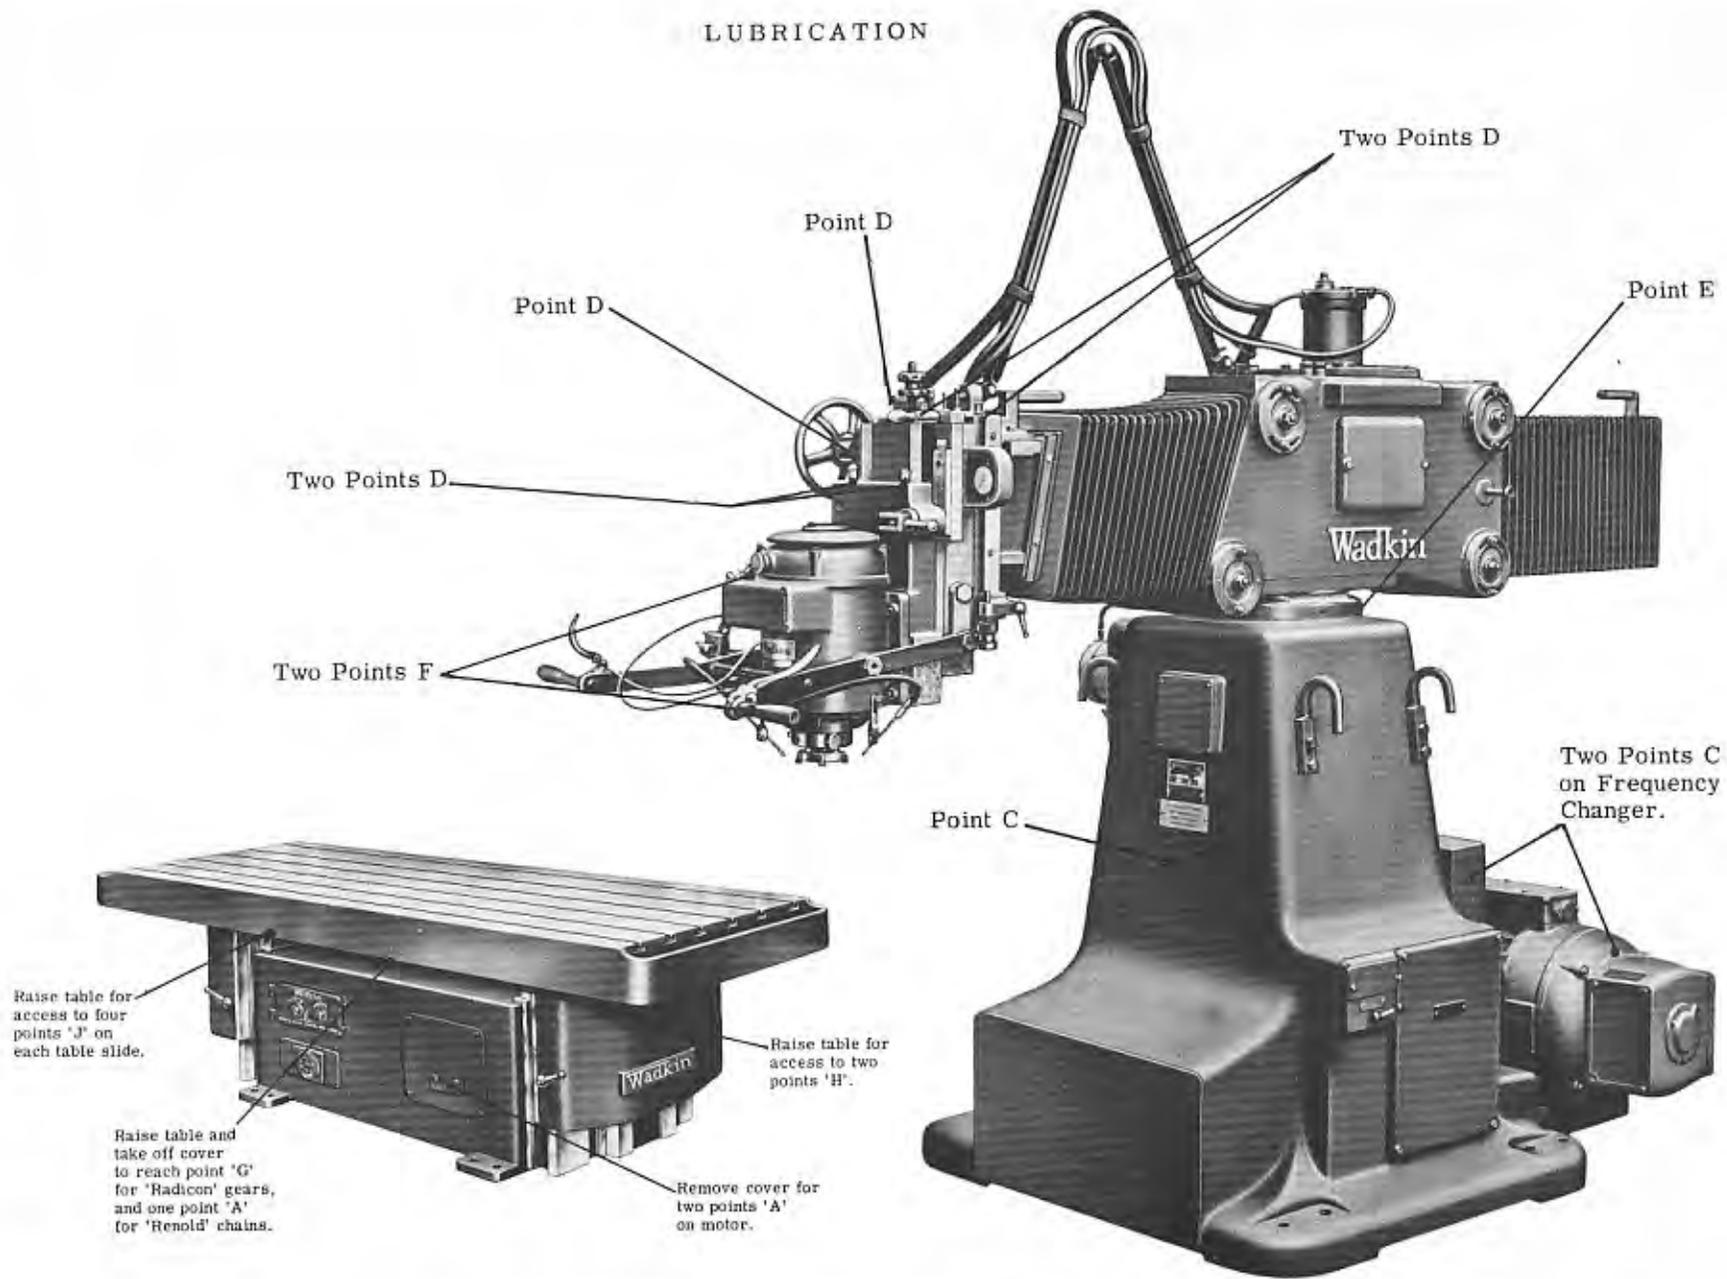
GENERAL VIEW OF MACHINE AND POWER RISE AND FALL TABLE SHOWING LUBRICATION POINTS.
